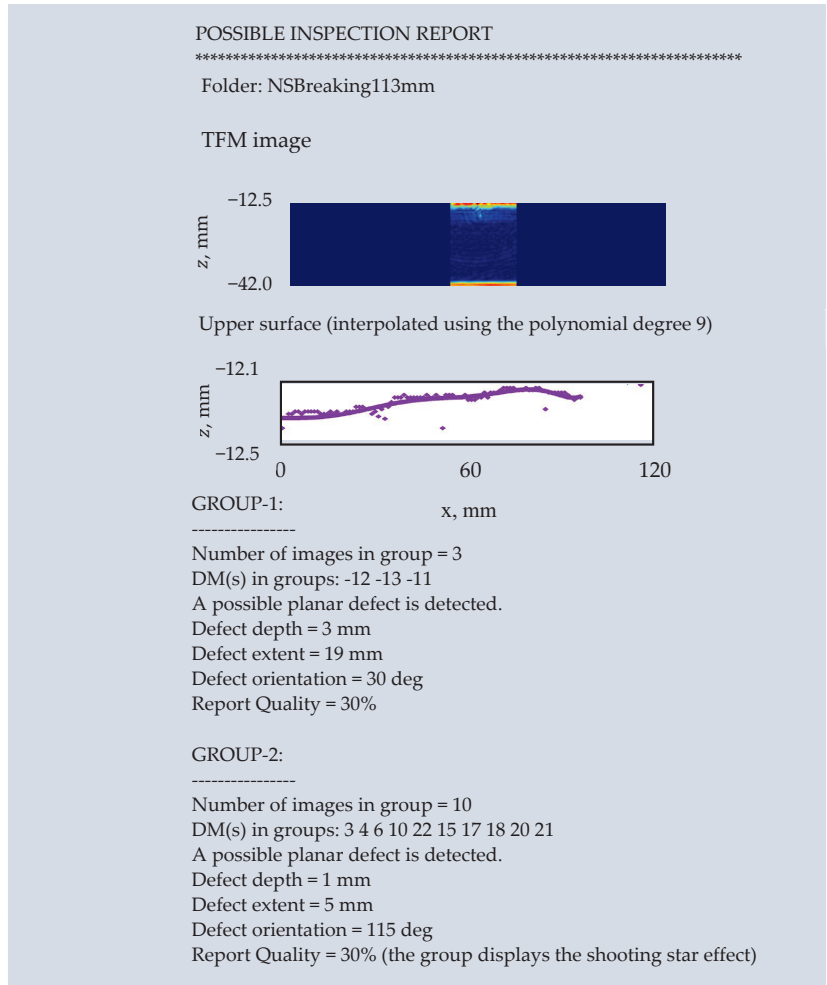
Inspection report for the surface-breaking notch located 113 mm from the left edge.
